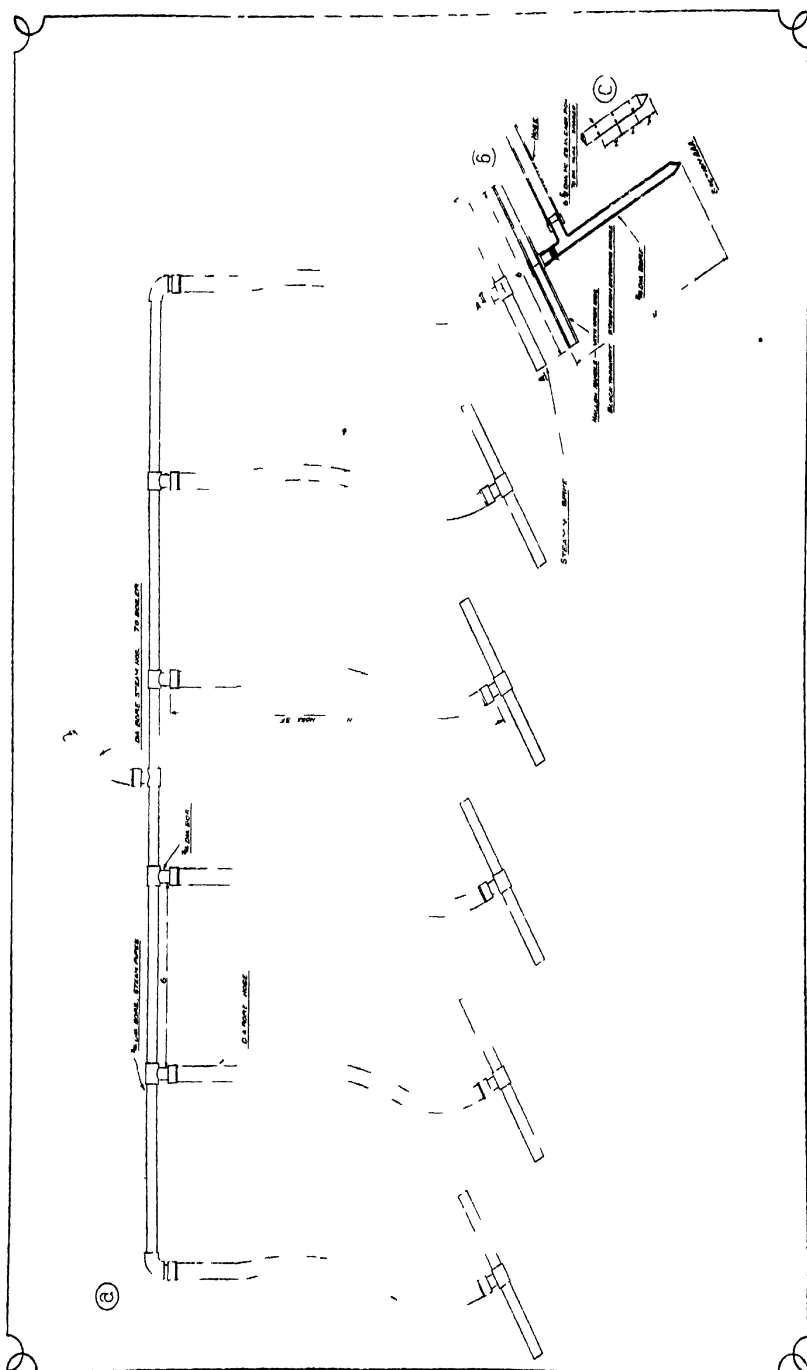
Steam sterilisation by the "spike" system: (a) the apparatus, (b) section through a spike, (c) external view of the end of a spike showing position of the holes.
